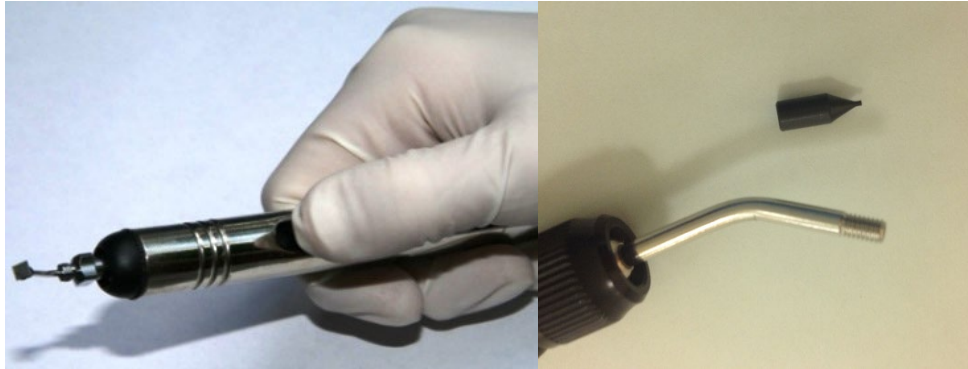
On the left, die on a vacuum pick up tool, on the right, vacuum pick-up tool and a nozzle
